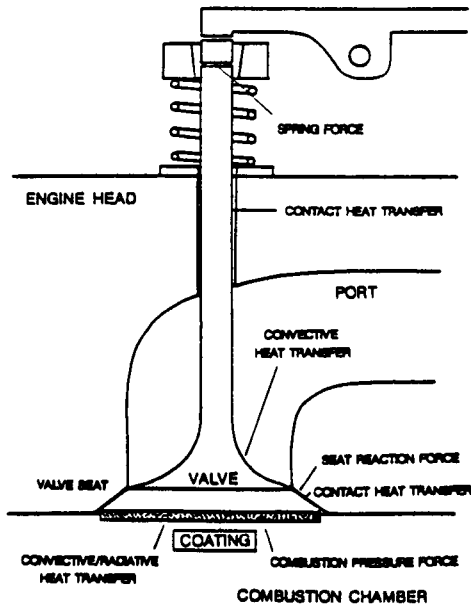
Thermal and mechanical loads on a diesel engine valve.
